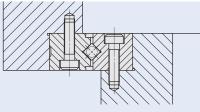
Example of mounting to the housing of Mounting Holed Type High Rigidity Crossed Roller Bearing
